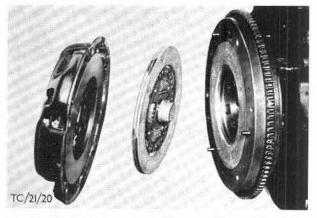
Clutch pressure plate with clutch disc and flywheel.
